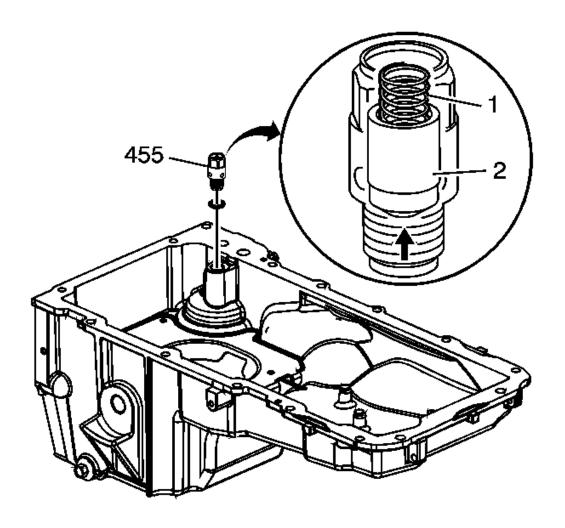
View Of Oil Pressure Relief Valve Components Courtesy of GENERAL MOTORS CORP.
